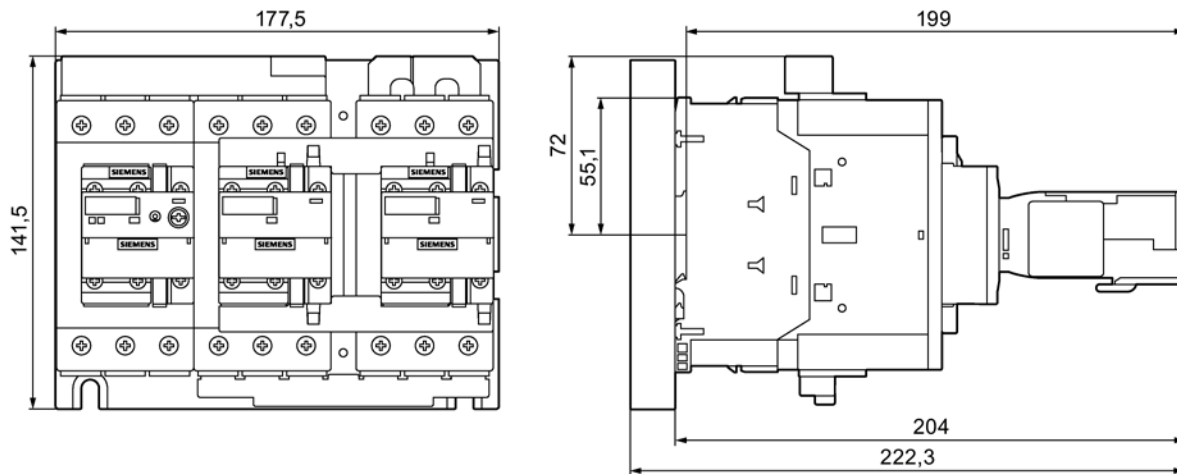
Contactor assembly for star-delta (wye-delta) start S2-S2-S2 on mounting plate
